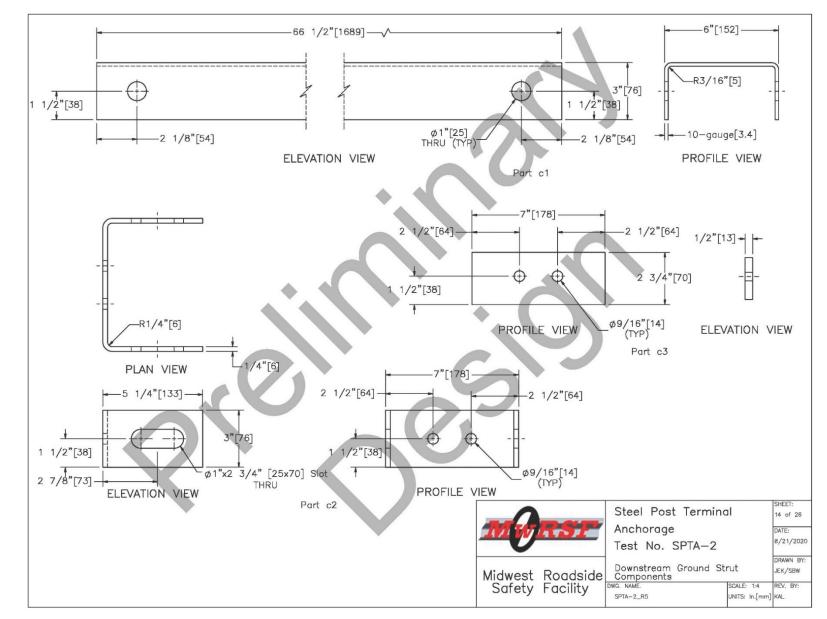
Downstream Ground Strut Components, Test No. SPTA-2
